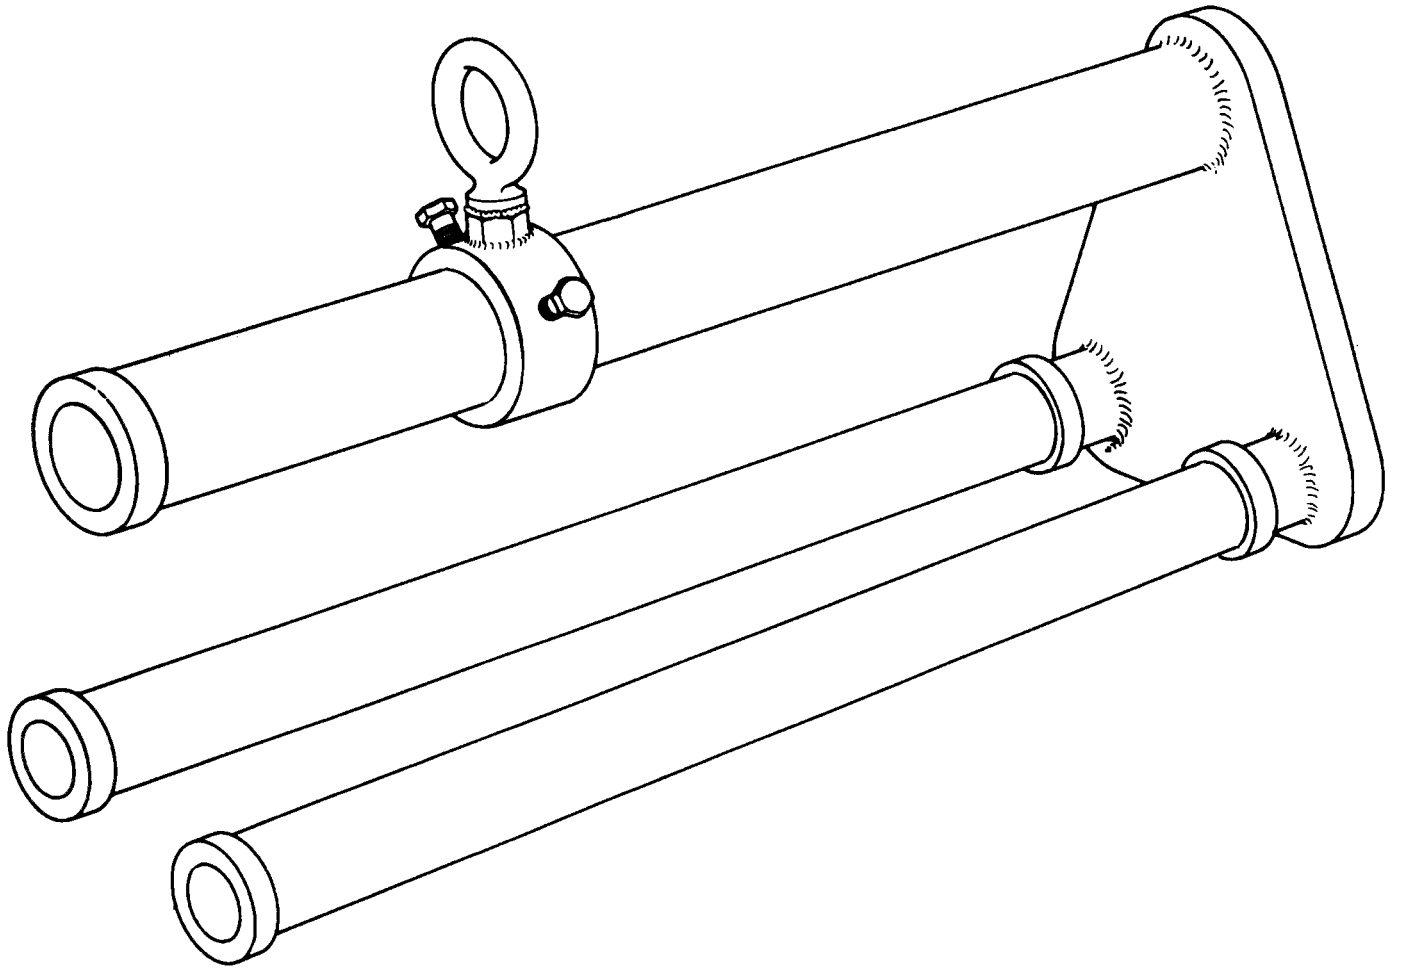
Ammunition Rack Removal and Lifting Tool (Sheet 2 of 2)
